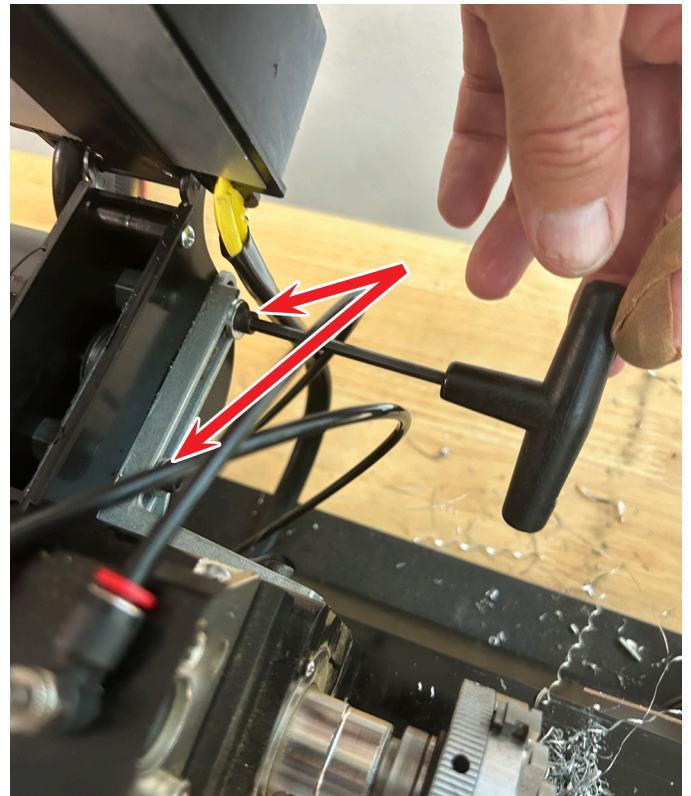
The red arrows show the locations of the two bracket adjustment screws.
